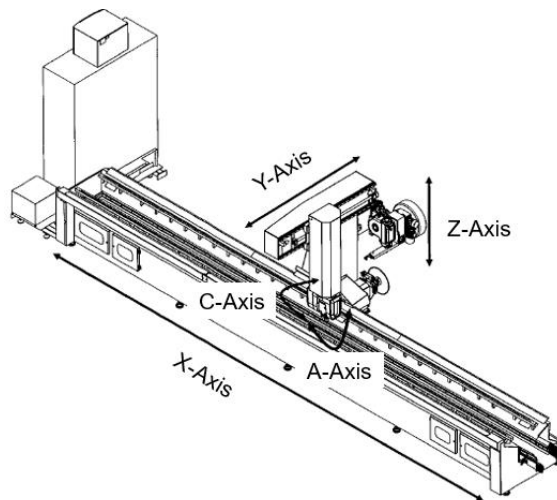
Scheme of the 5 axes on the Ralc machining center [18].
